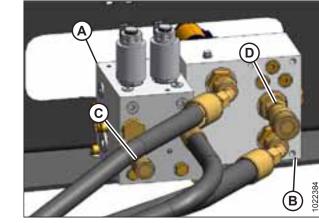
Manifolds without Reverser Manifold Configured for Auger Header – M155 Shown, M200 Similar
